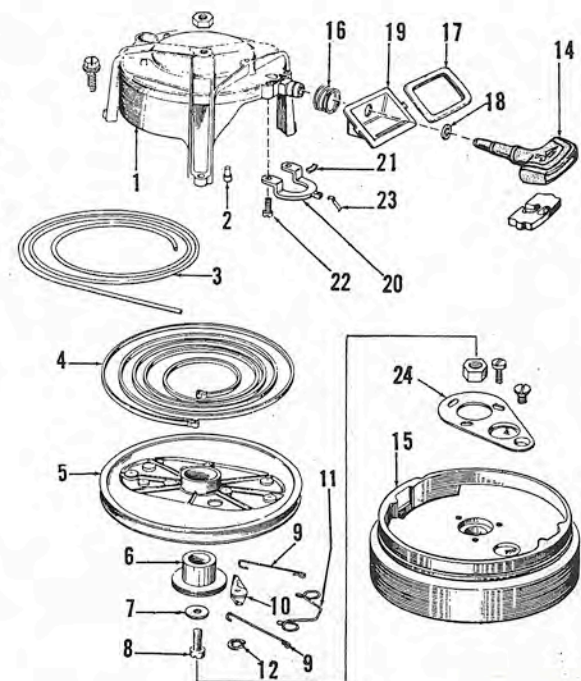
Exploded view of manual starter used on late series CD motors. Starters are similar for late QD and all AD and FD motors.
